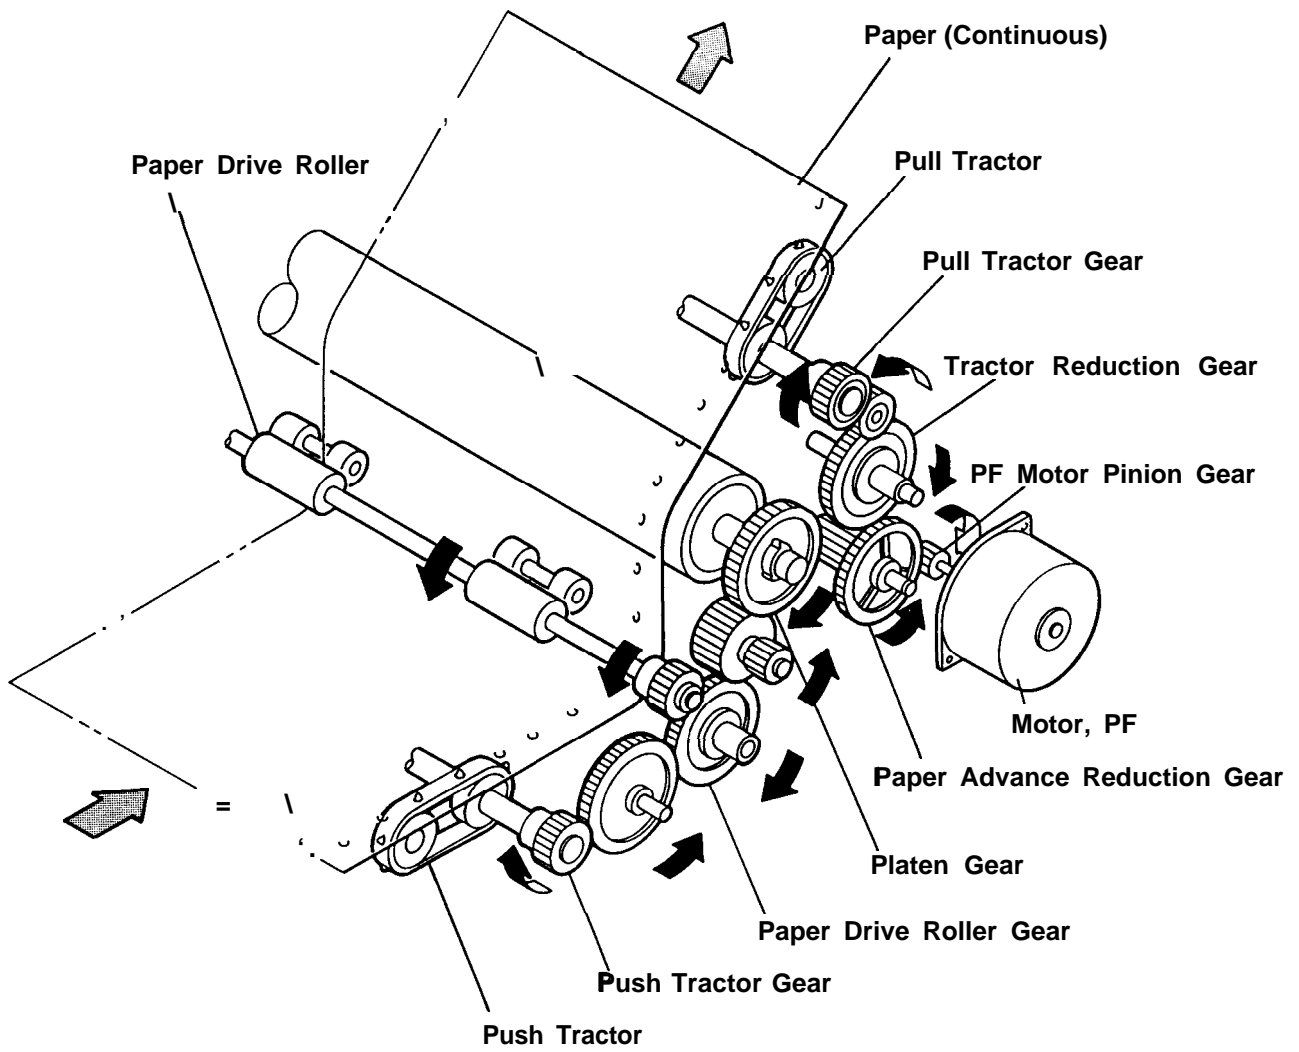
Push-pull Tractor Operation Using the Front Paper Entrance
